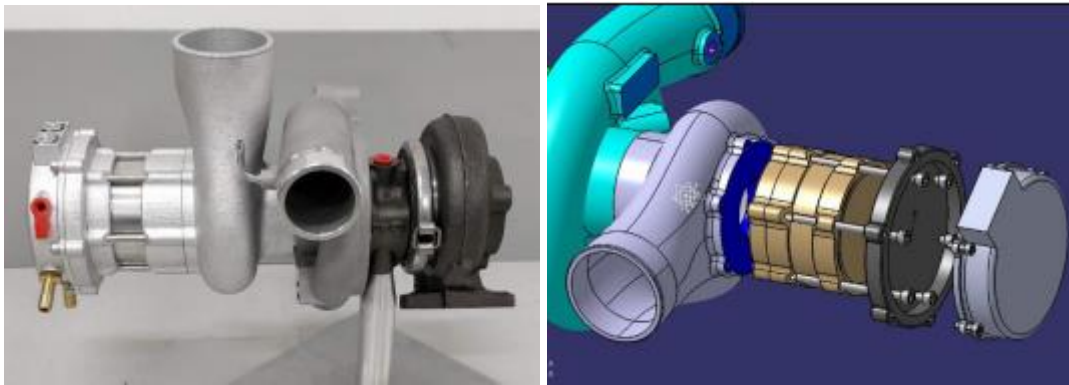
FIGURES OF THE FIRST MOCK-UP OF THE ELECTRIC ASSISTED TURBOCHARGER. IN THIS DESIGN, A DONUT-SHAPED ATTACHMENT IS DESIGNED FOR THE COMPRESSOR ON WHICH THE ELECTRIC MOTOR CAN BE ASSEMBLED [4].
